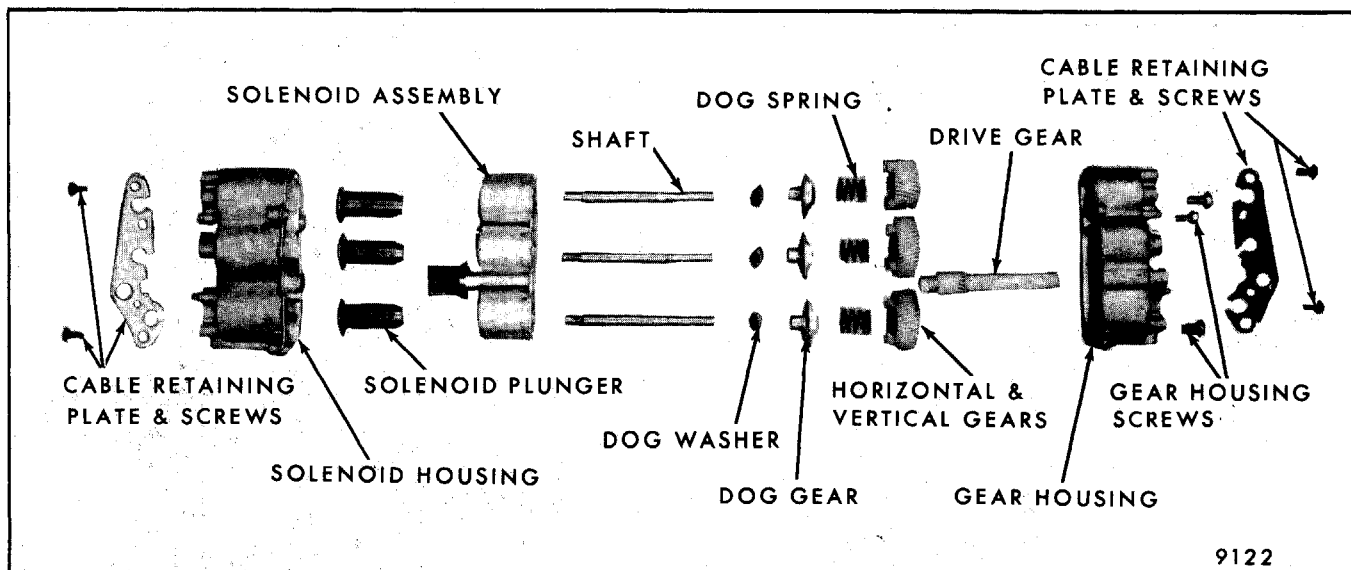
Six-Way Seat Adjuster Transmission Component Parts - Full Width Bench Seat
